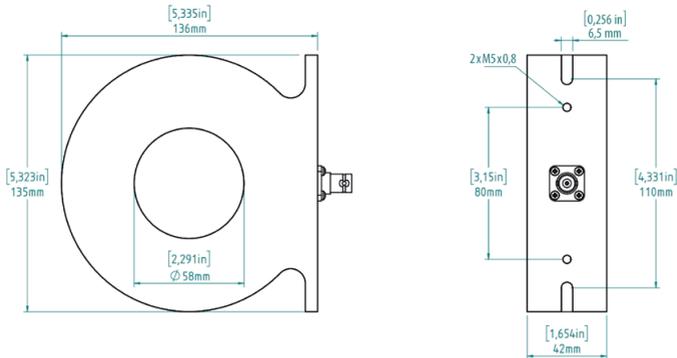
PMK LILCO®-Series 58 Mechanical Dimensions
